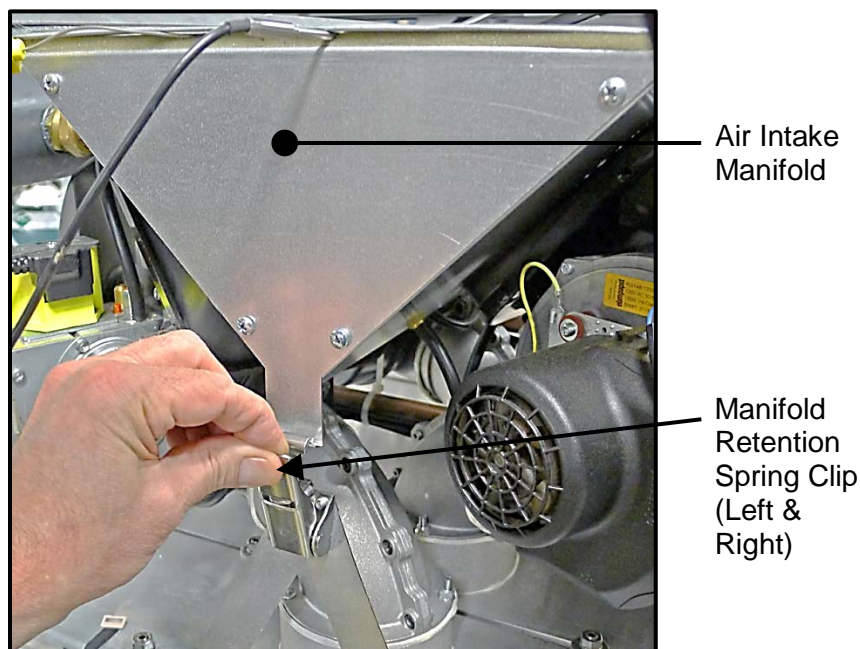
Unlatch Spring Clips from Left and Right Side of Manifold
